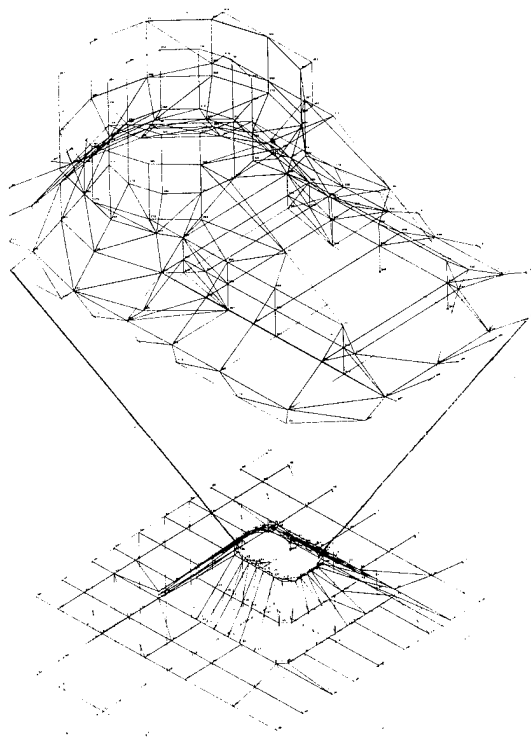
Finite Element Model Gearcase and Cone.
